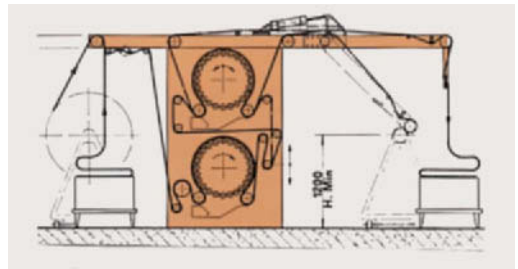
A Lafer duplex raising machine with suèding rollers.
